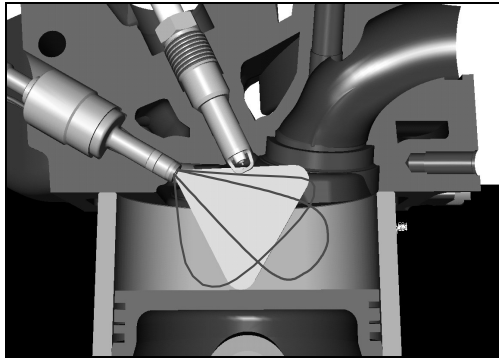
Placement of spark plug and fuel injector (with spray configurations outlined)
